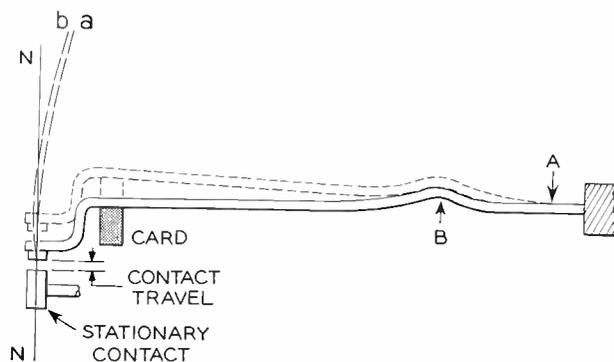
Wire spring relay armature showing clamping points and bend.
